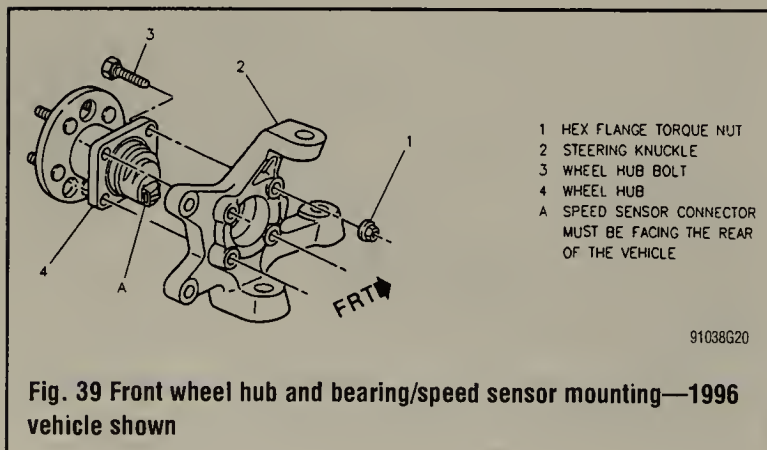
Front wheel hub and bearing/speed sensor mounting—1996 vehicle shown
